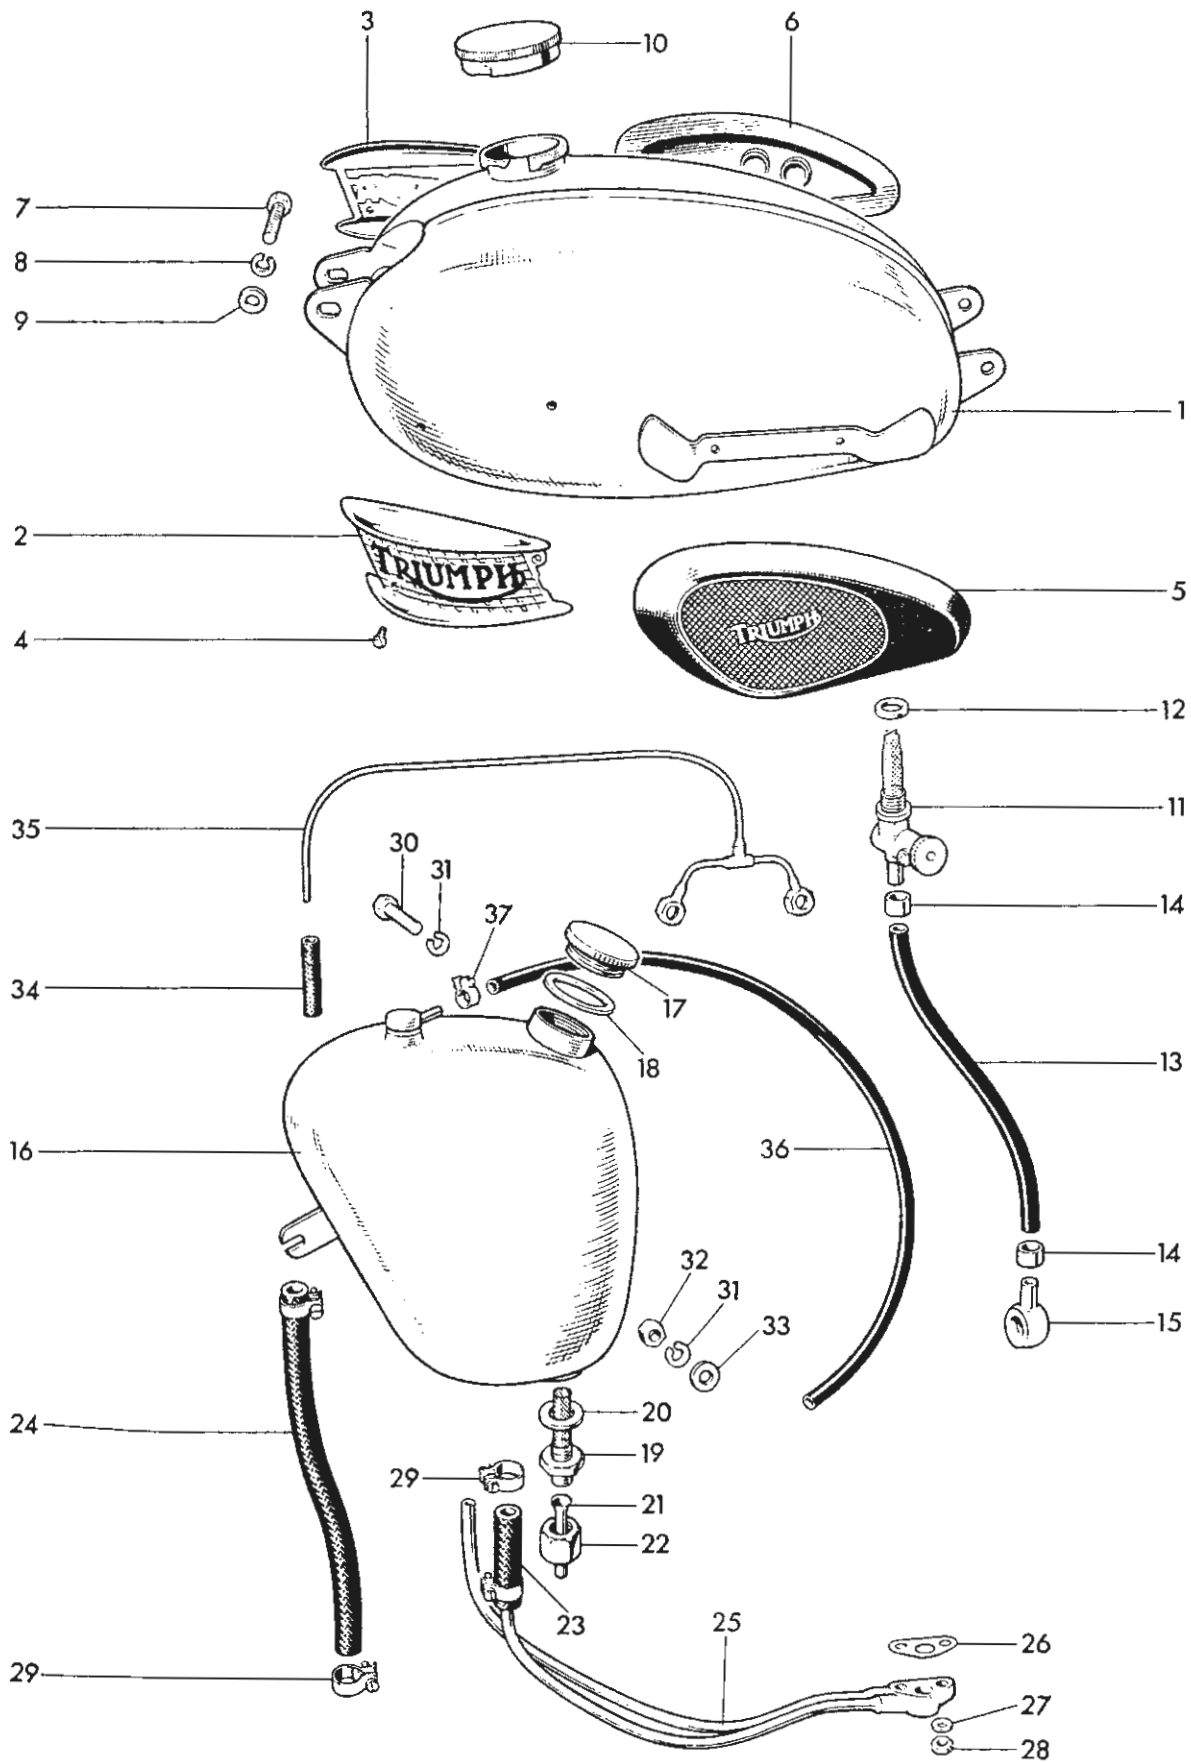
PETROL AND OIL TANKS, BANTAM CUB
